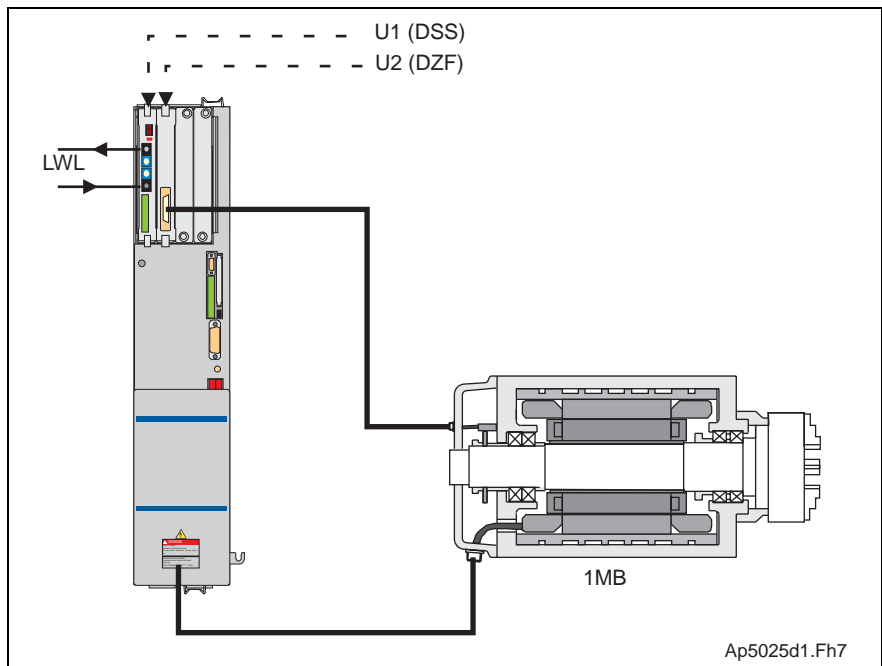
1MB motor with gear wheel encoder with 1Vpp signals on a DZF03.1M plug-in module
